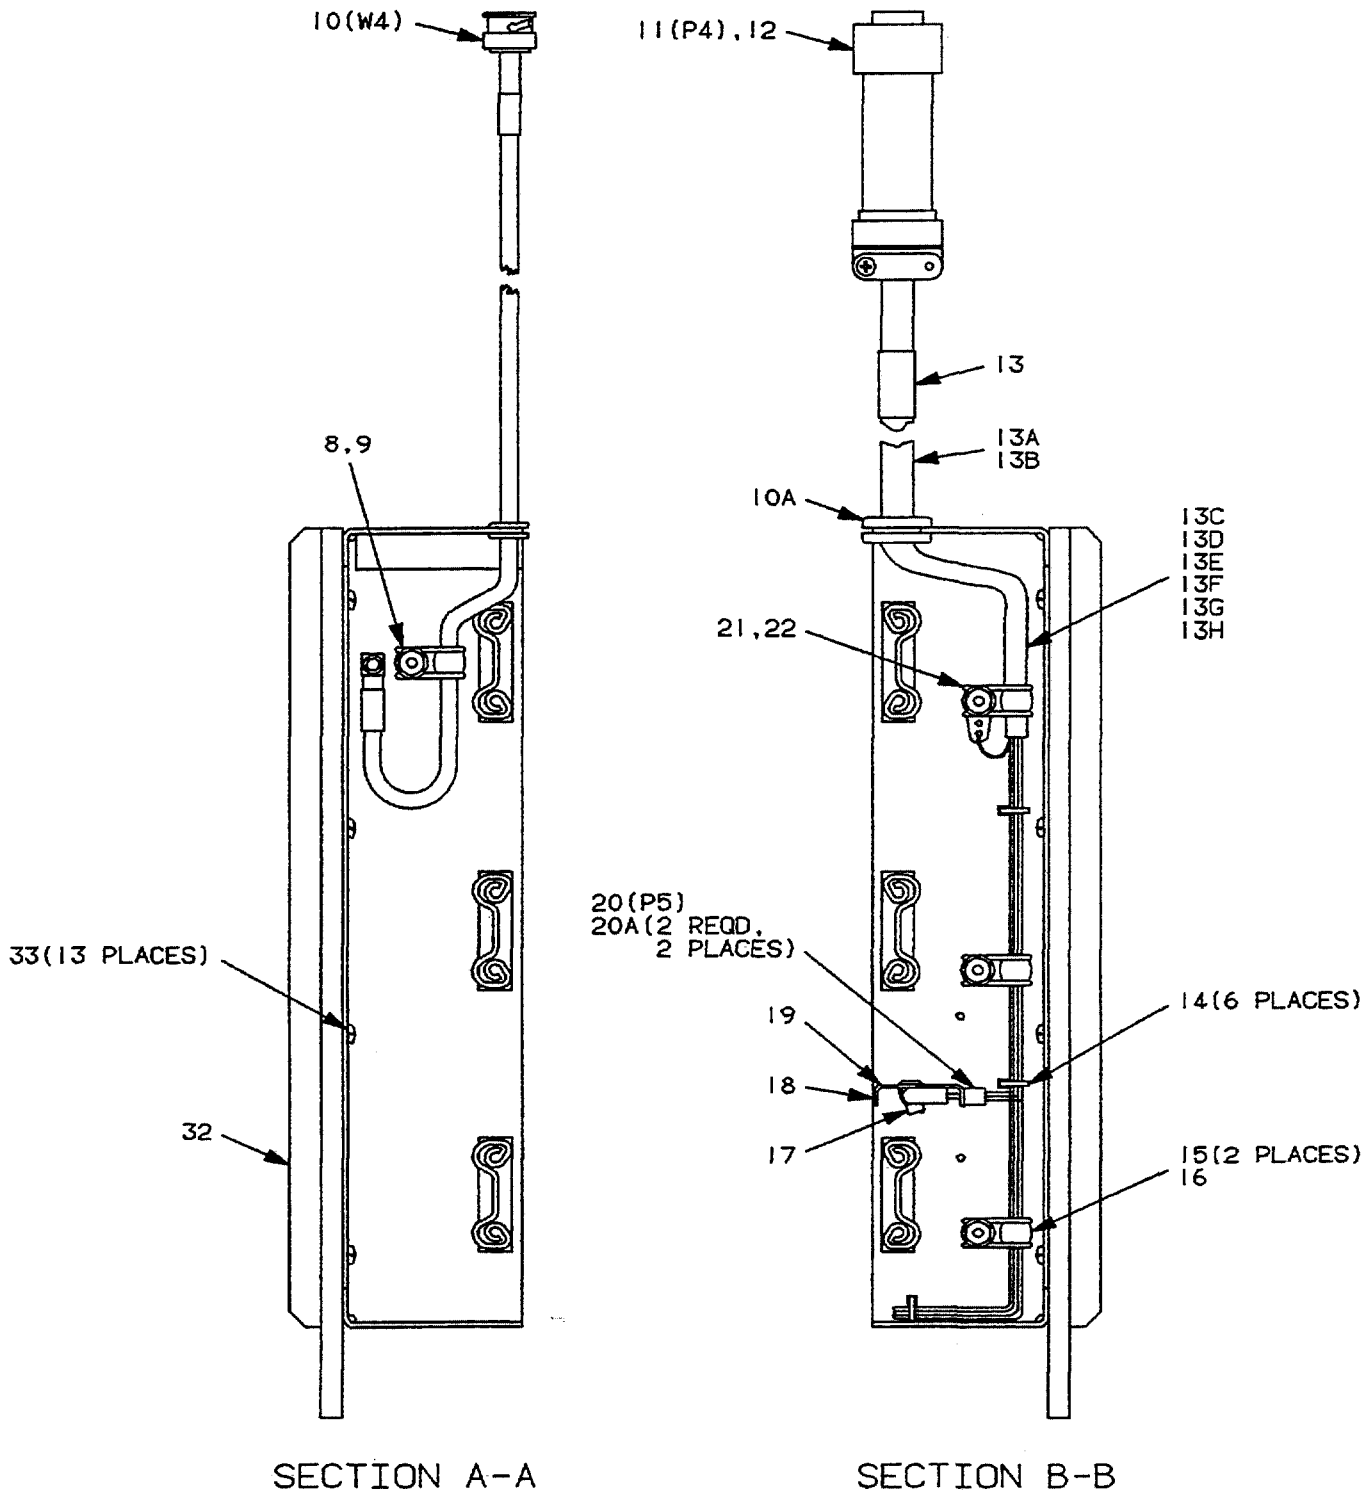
Power Amplifier Chassis Assembly (Sheet 1 of 2)
